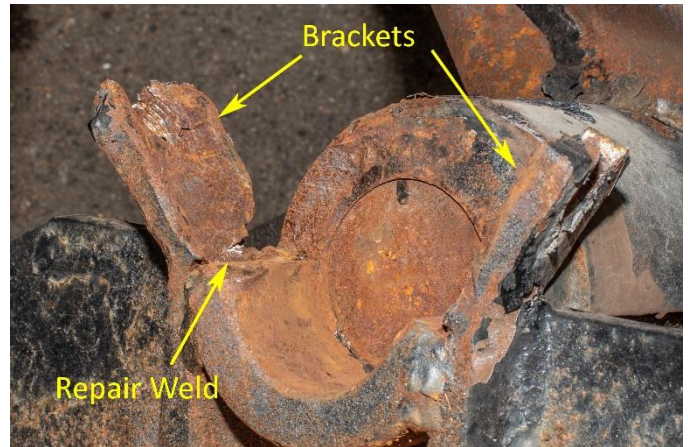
Right Side Hoist Kingpin Assembly and Failure Location
